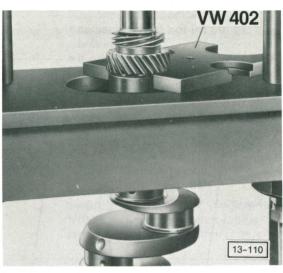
Distributor drive gear/crankshaft timing gear, removing
